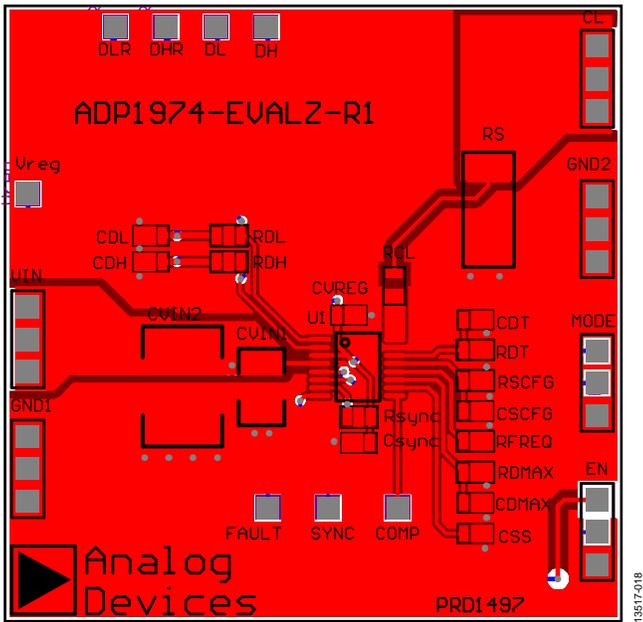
ADP1974 Evaluation Board PCB Top Layer
